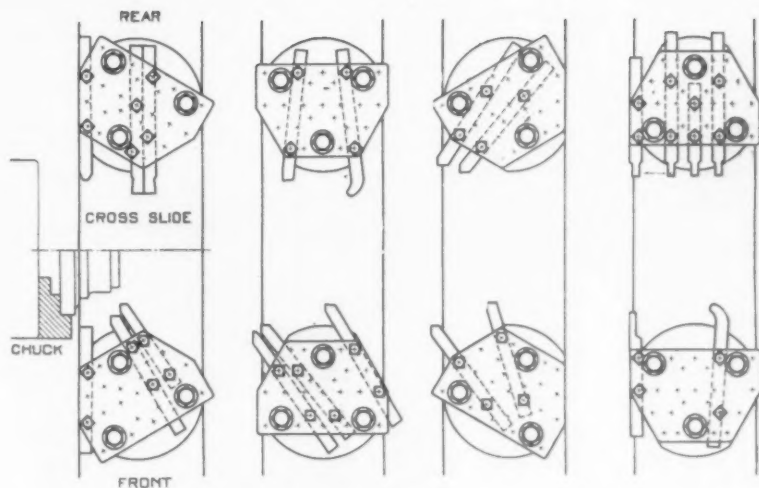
Method Sketches Showing Four Positions of Front Cutter Block and of Rear Cutter Block. Inexpensive forged cutters or bits are used
